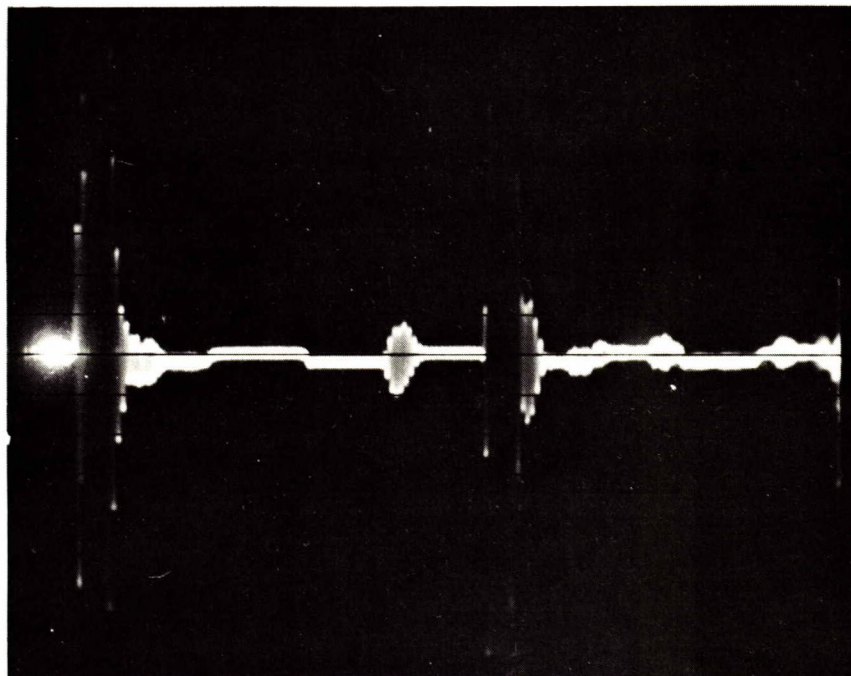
Reflectogram illustrating indications from a rotor test block containing a $1/16$ in. diam. flat-bottomed hole 3 in. from the search unit. $2\frac{1}{4}$ Mc setting as for Figure 38.
